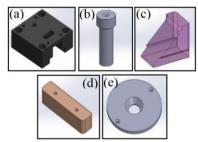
(a) Cavity plate (b) Sprue (c) Slanted glass (d) Slot (e) locating ring
